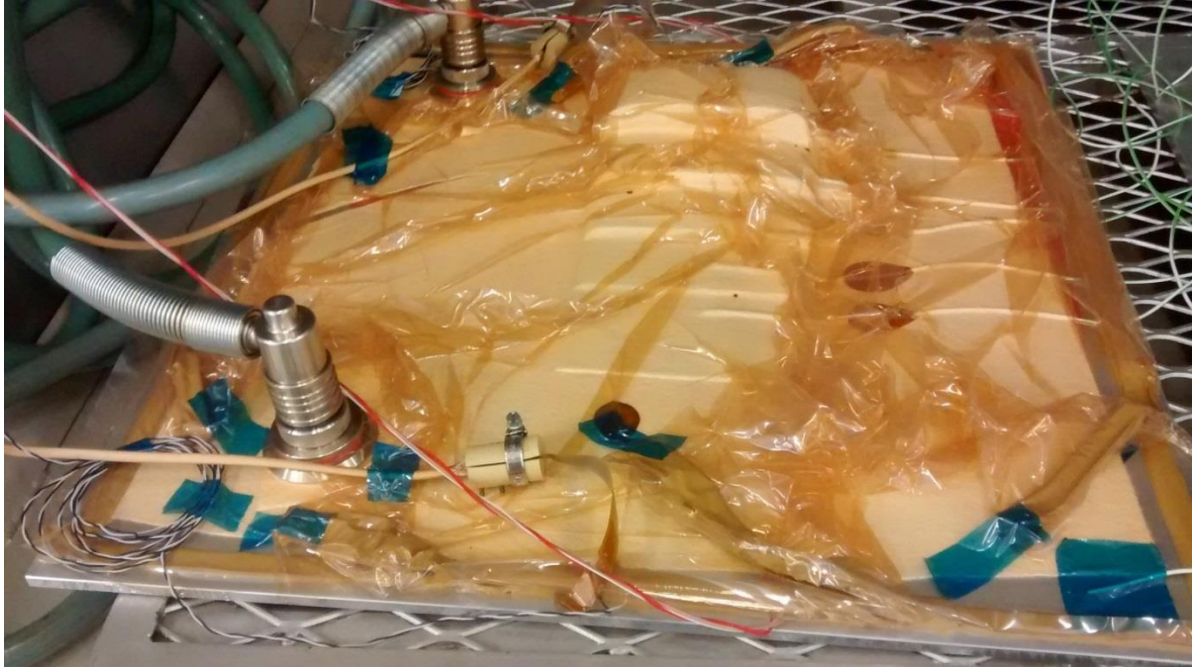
A cured stepped wedge in the autoclave with vacuum hoses, DEA sensors (gold strips passing into PEEK connector protection cylinders, J type thermocouples (black and white) and DC sensors (red and white) are connected front and rear. K type thermocouples (green and white) are on the right.
